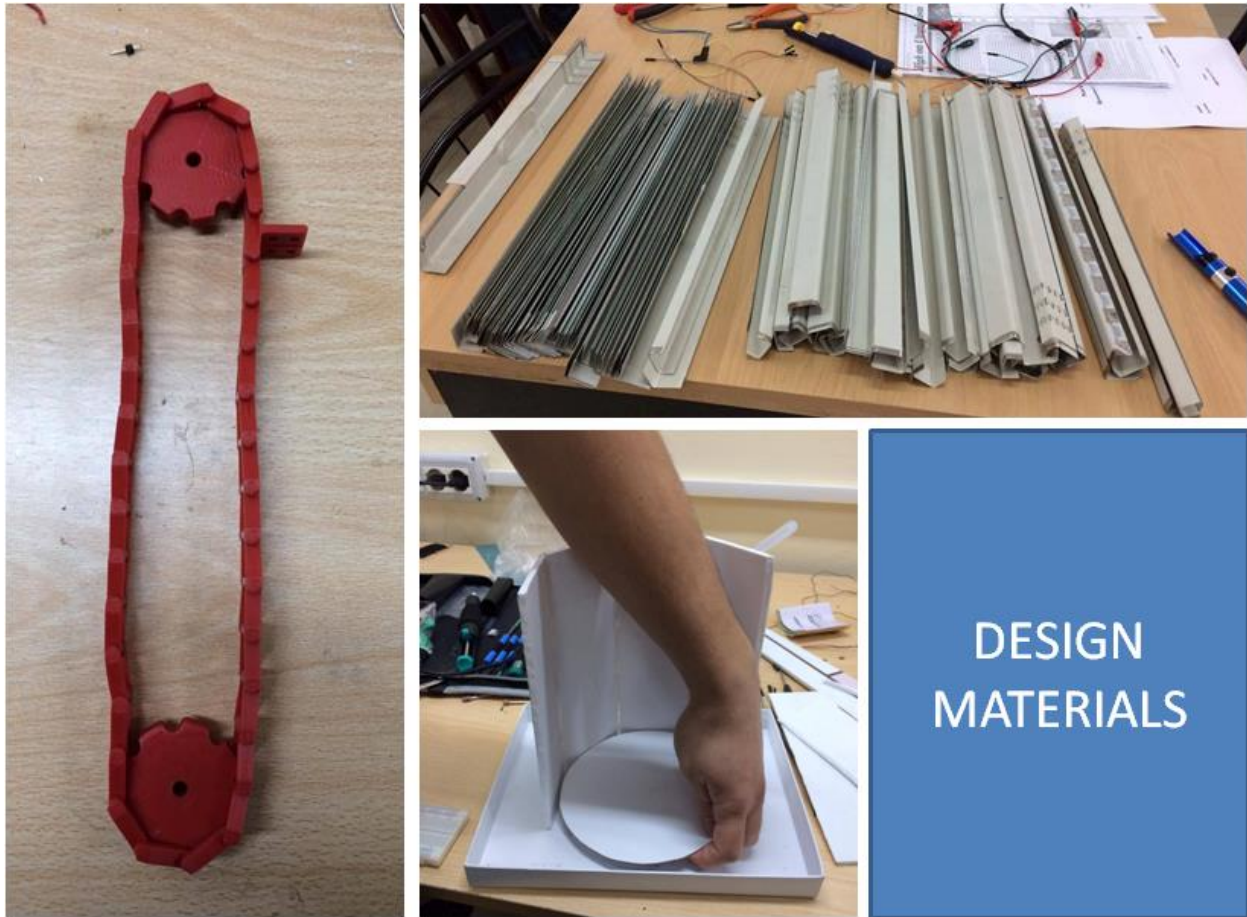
3D printed plastic (right), C- and L-channel pieces (left top), and foamcore (middle bottom)
